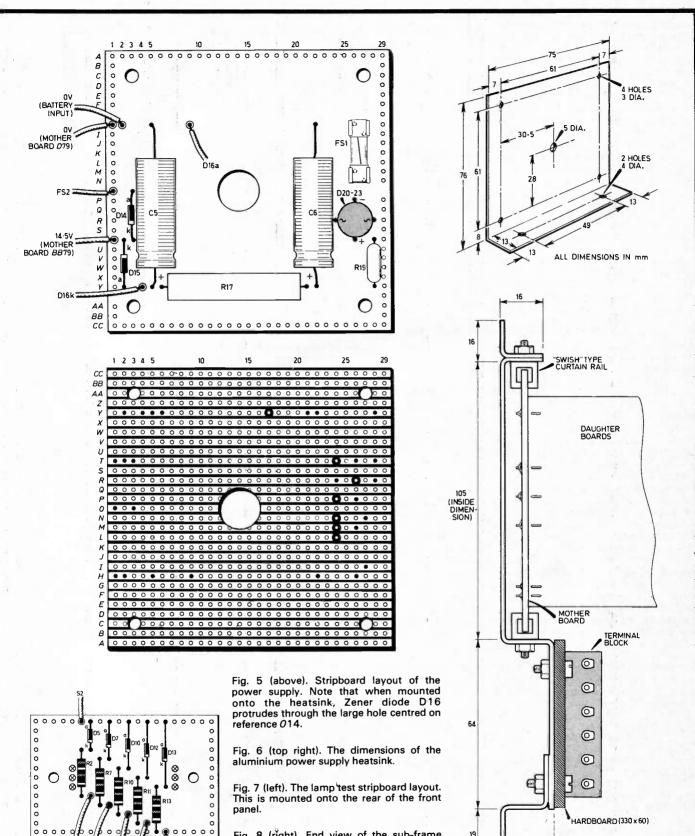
(right). End view of the sub-frame assembly giving important dimensions. Three fabricated aluminium brackets about 16mm wide are required, one at either end and one in the centre.
